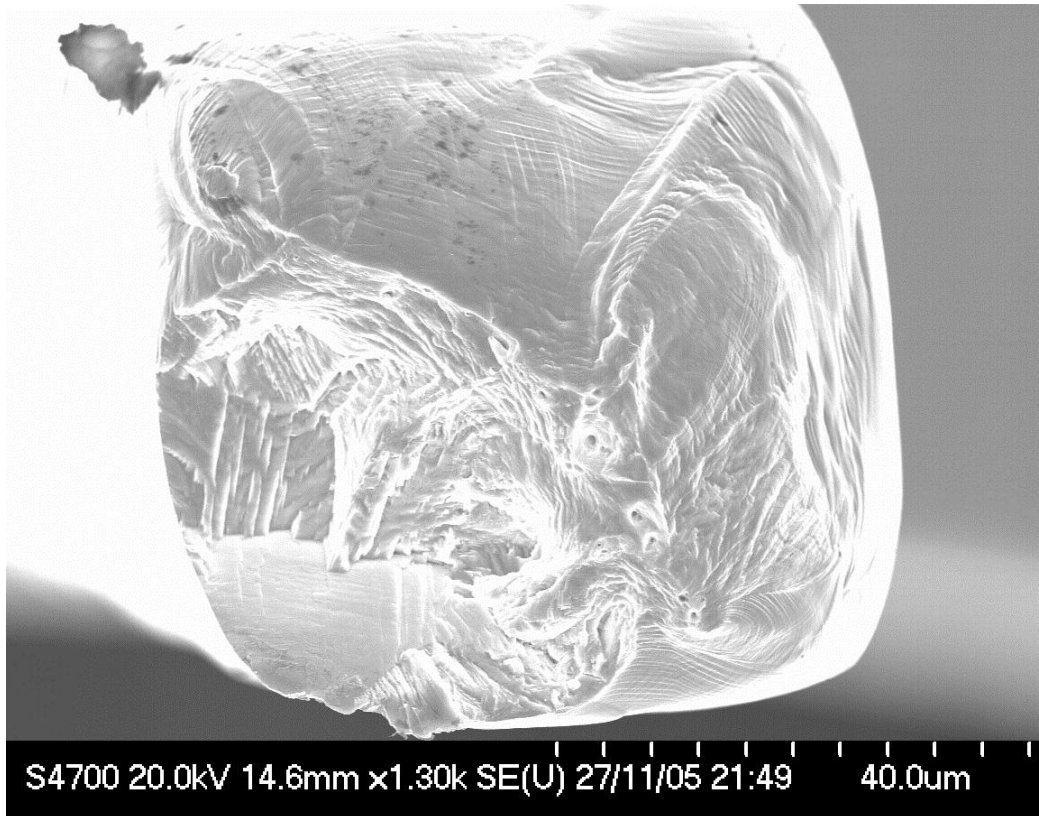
Crack extension on favourable orientated plane. Fracture surface of CII_01_75. Specimen failed at 290,000 cycles. 75 μ m specimen.
